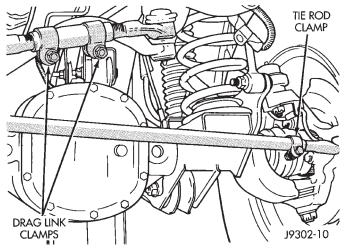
Tie Rod/Drag Link Clamp Bolt
